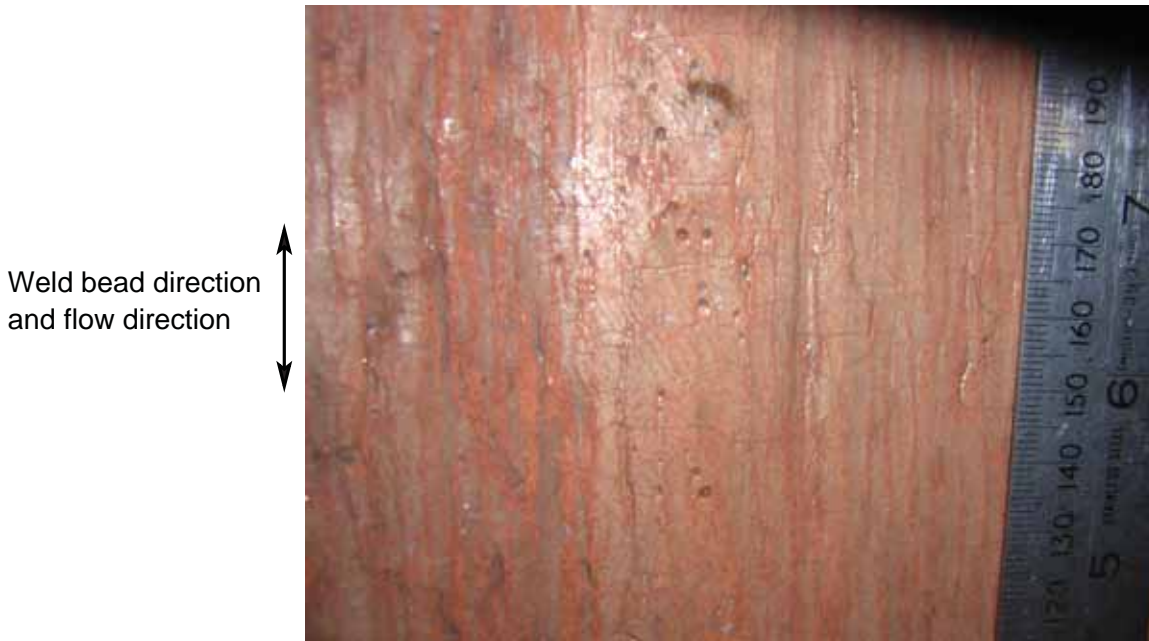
Wear surface of WeldoverlayA spool showing the check crack pattern and other wear surface features.
